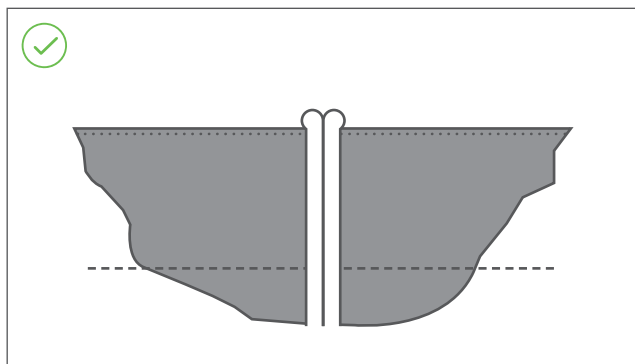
Butt-weld with big welding beads (acceptable)
